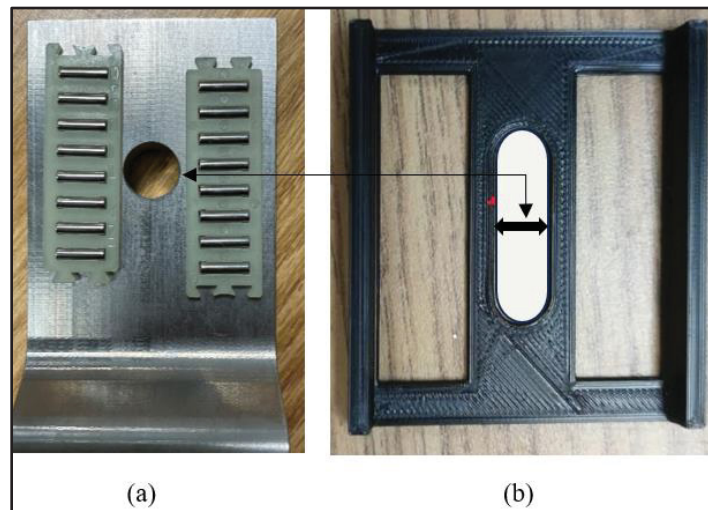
(a) Two roller bearings on the clamped member; (b) 3D printed hard plastic housing to accommodate the bearings and the bolt through the hole
